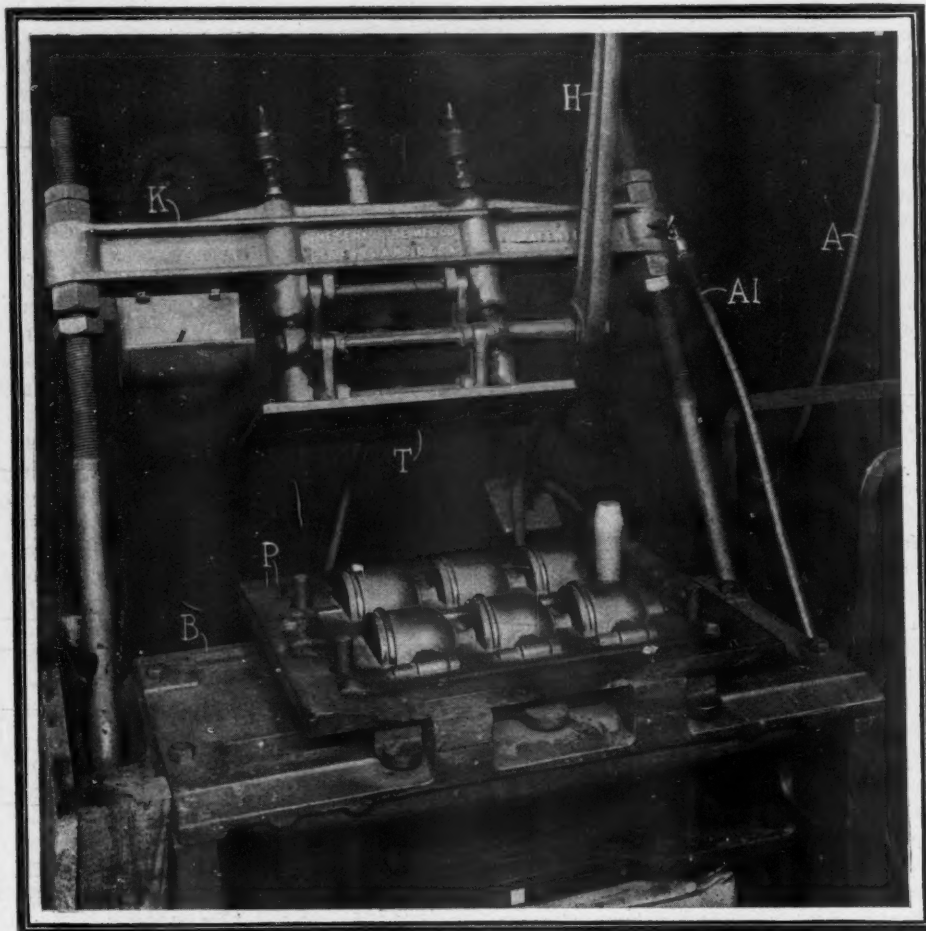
HAND MOULDING MACHINE IN SCHEBLER FACTORY
